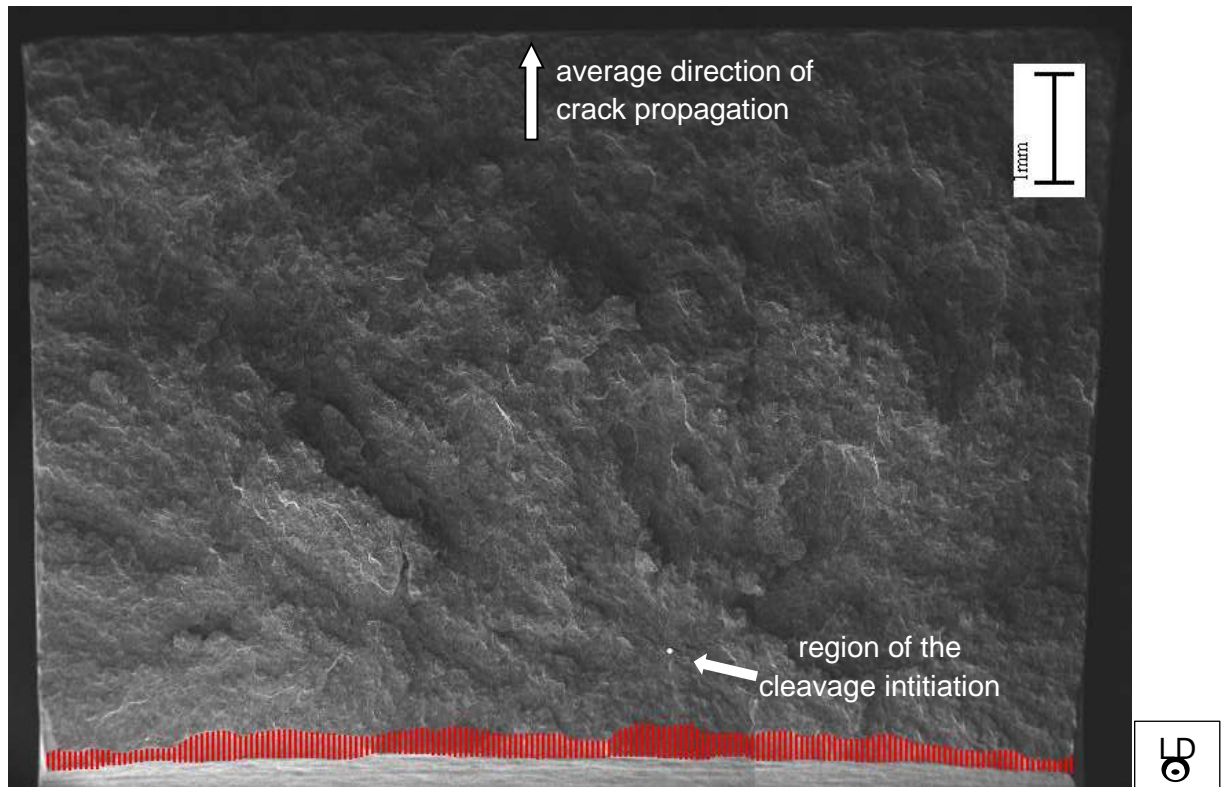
Fracture surface of 0Ti 35, specimen 1. The region highlighted in red is the ductile crack extension.
